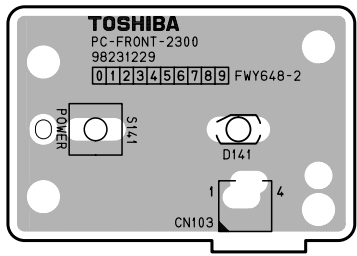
EU04 Power Switch PC Board (Top side)
